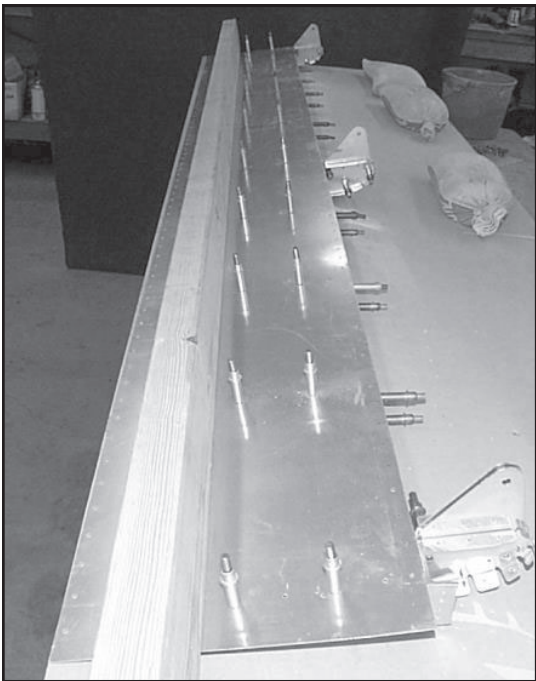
The bottom flap skin is drilled to the rib/spar/bracket subassembly.
